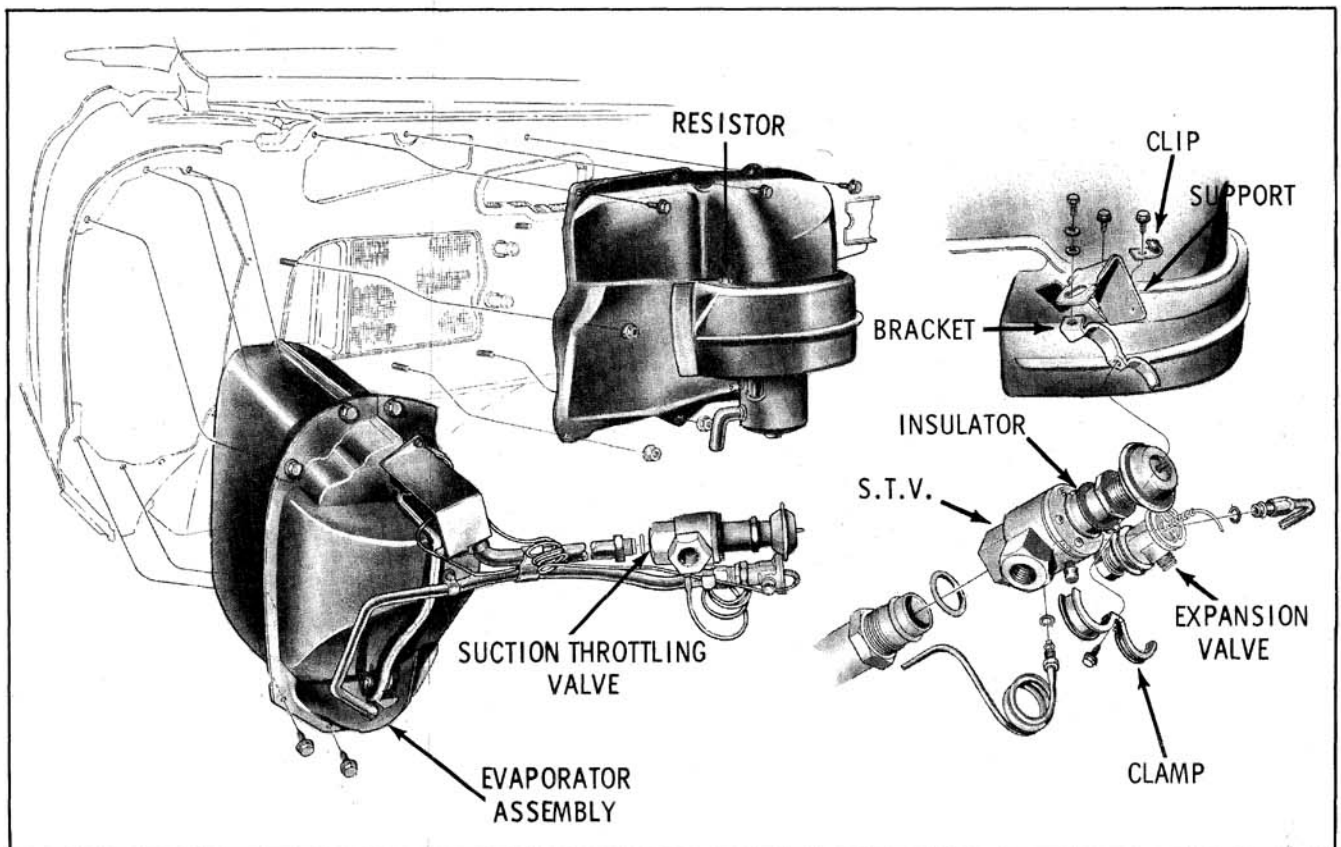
Blower Motor and Evaporator (33 through 38 Series)
